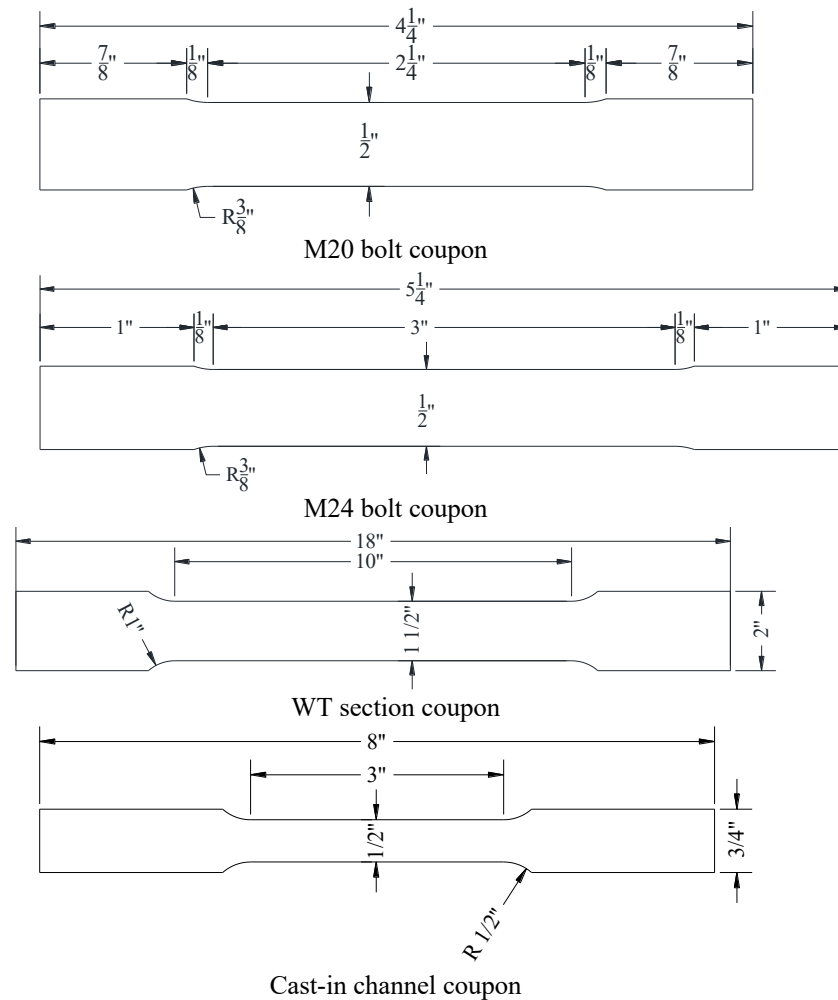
Pushout test tensile coupon dimensions (units: inches)
